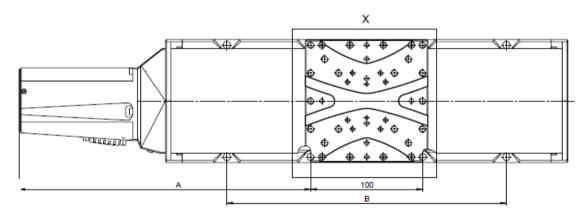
L-511 versions with BLDC motor and linear encoder, dimensions in mm
